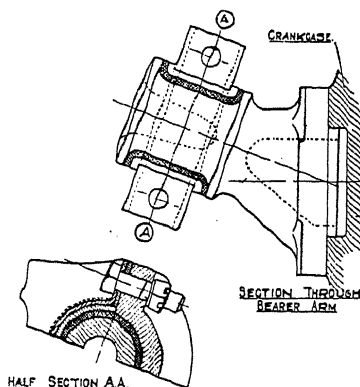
Trunnion pin mounting of Gipsy Twelve engine.
